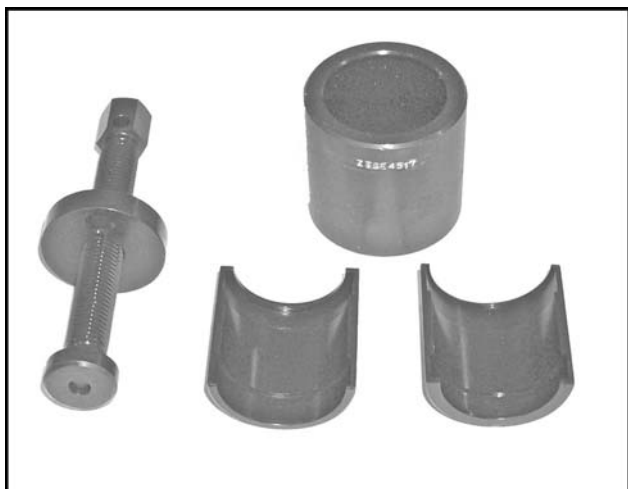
Front Wear Sleeve Remover, ZTSE4517
